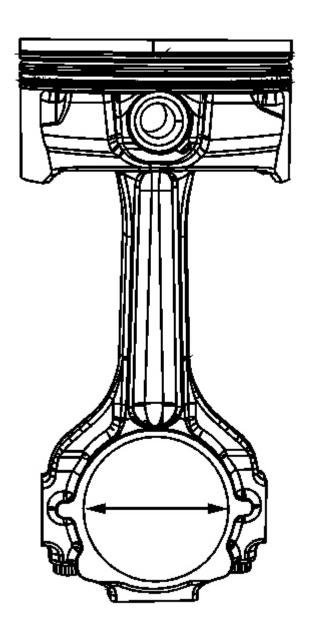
Measuring Connecting Rod Bearing Bore For An Out-Of-Round Courtesy of GENERAL MOTORS CORP.
